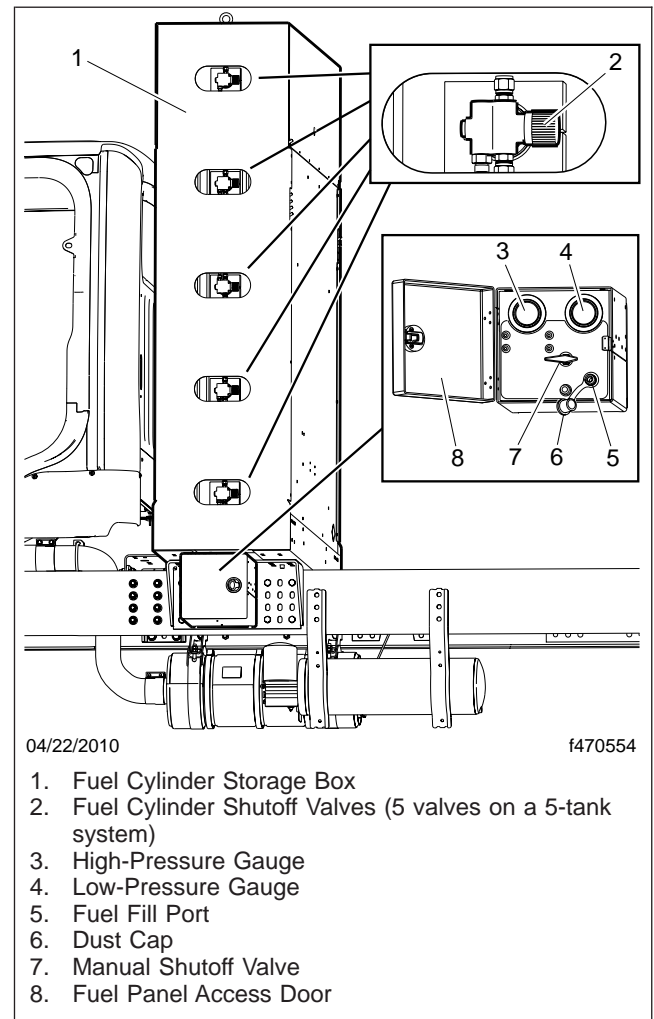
, CNG Fuel Cylinder Storage Box (5-cylinder system shown)
